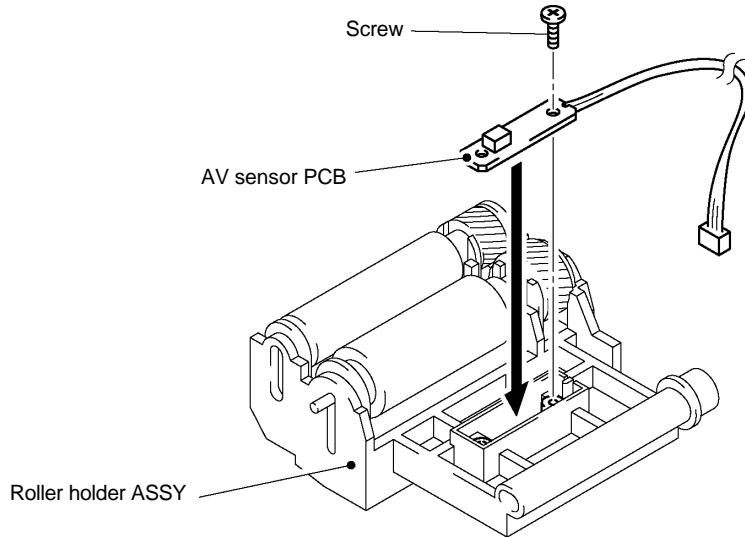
Reassembling the Head/Roller Holder Unit (1)
